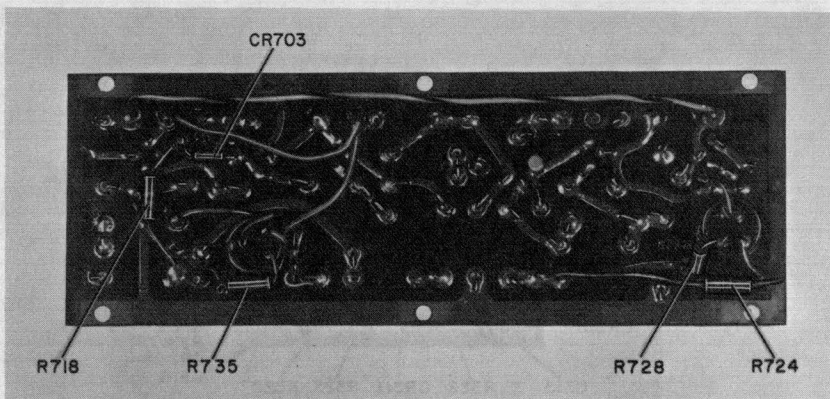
Sweep Generator, Printed Circuit Board Z701, Rear View
